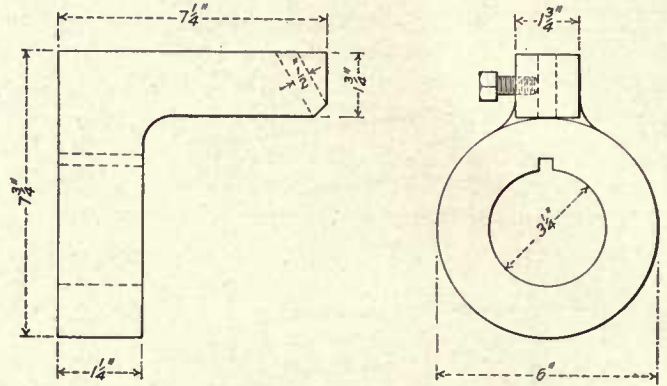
Tool for Machining Solid Side Rod Oil Cups.
